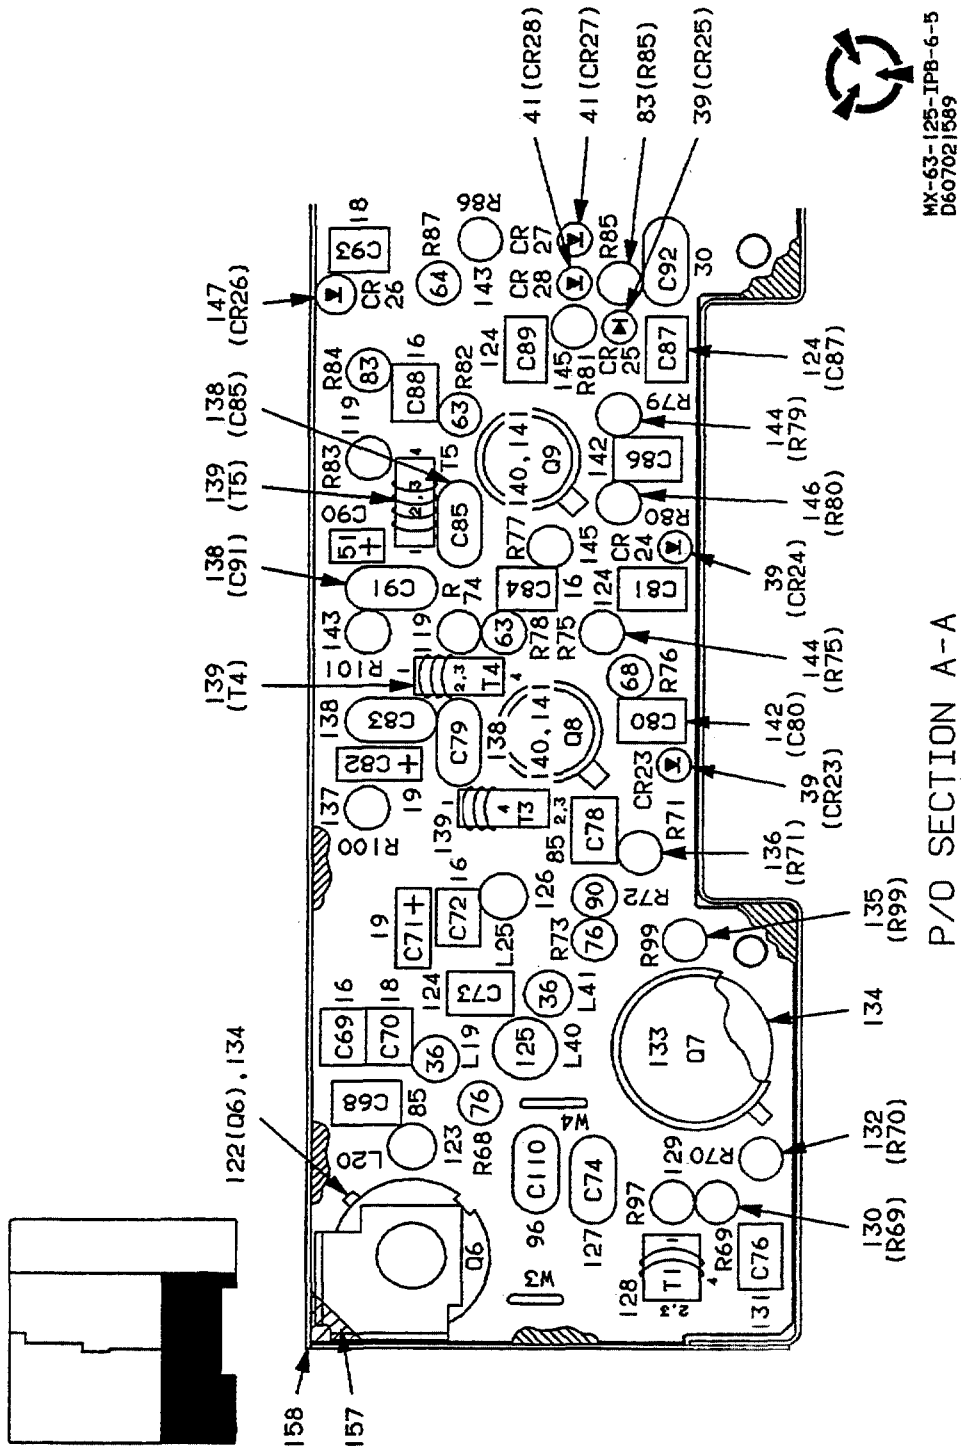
High Band RF/IF Module Assembly (Sheet 5 of 6)
